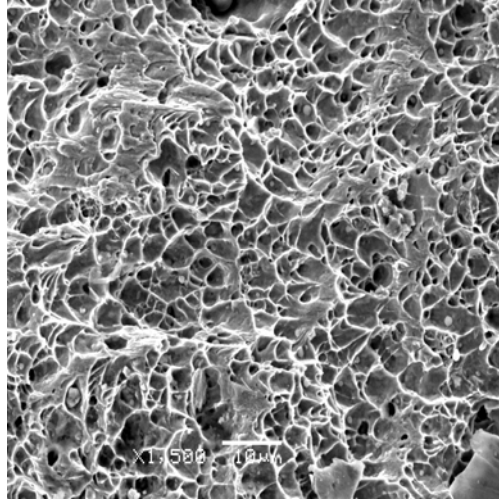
Microfractography of a joint welded using GMAW, fracture in the heat-affected zone, 1500x times magnified
